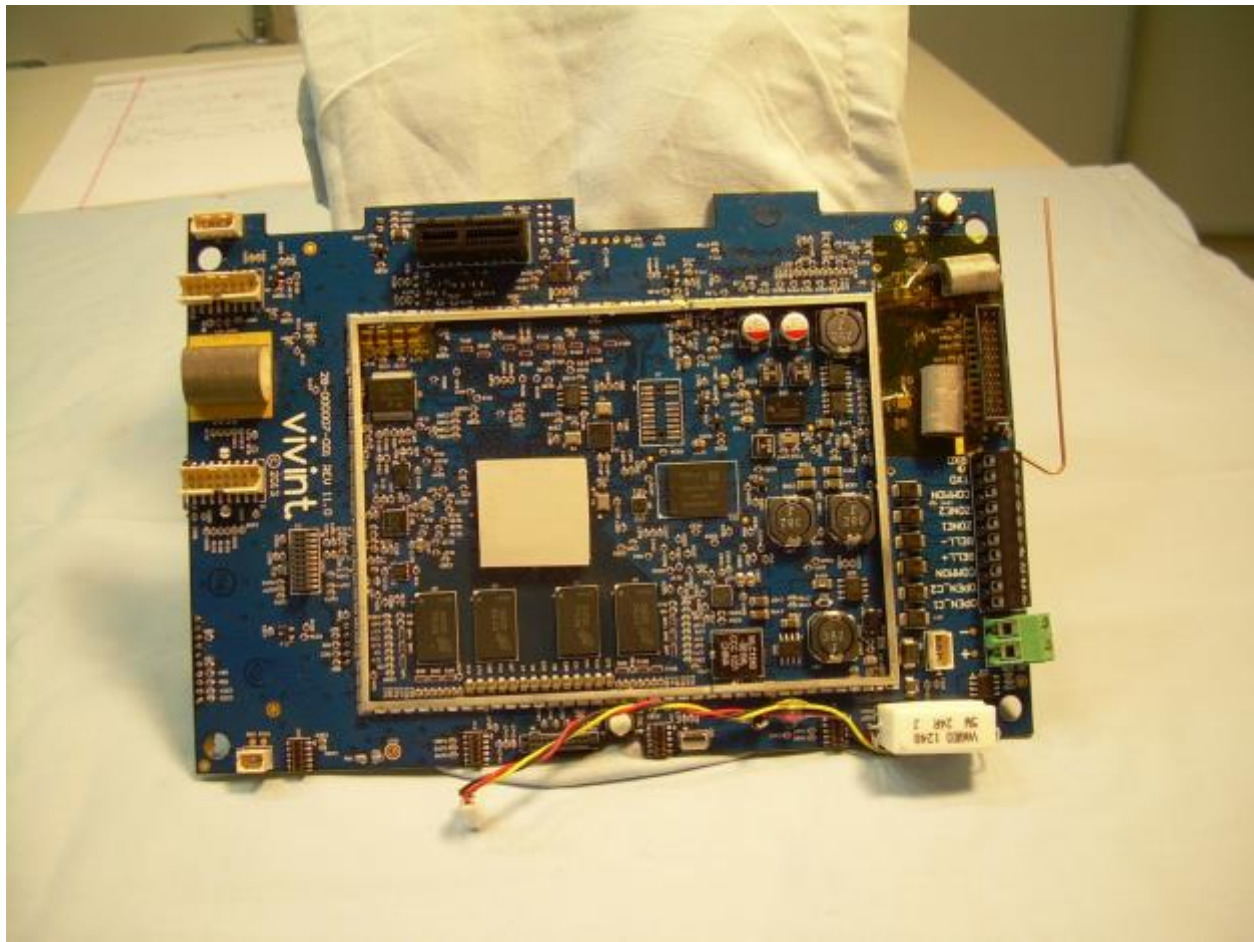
View of the Front Side of the Main PCB with RF Shield Removed
